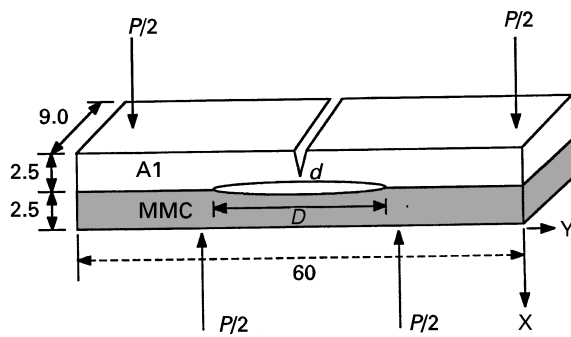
Four-point bend test specimens. All dimensions are in mm. The distance between two inner loading points is 2.54 cm while that between the two outer loading points is 5.08 cm.
